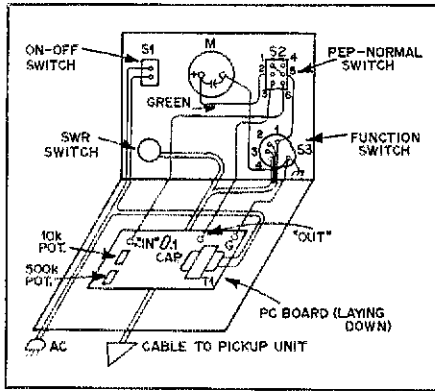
Guide for suggested installation of the amplifier/rectifier pc board into the HM-102.
